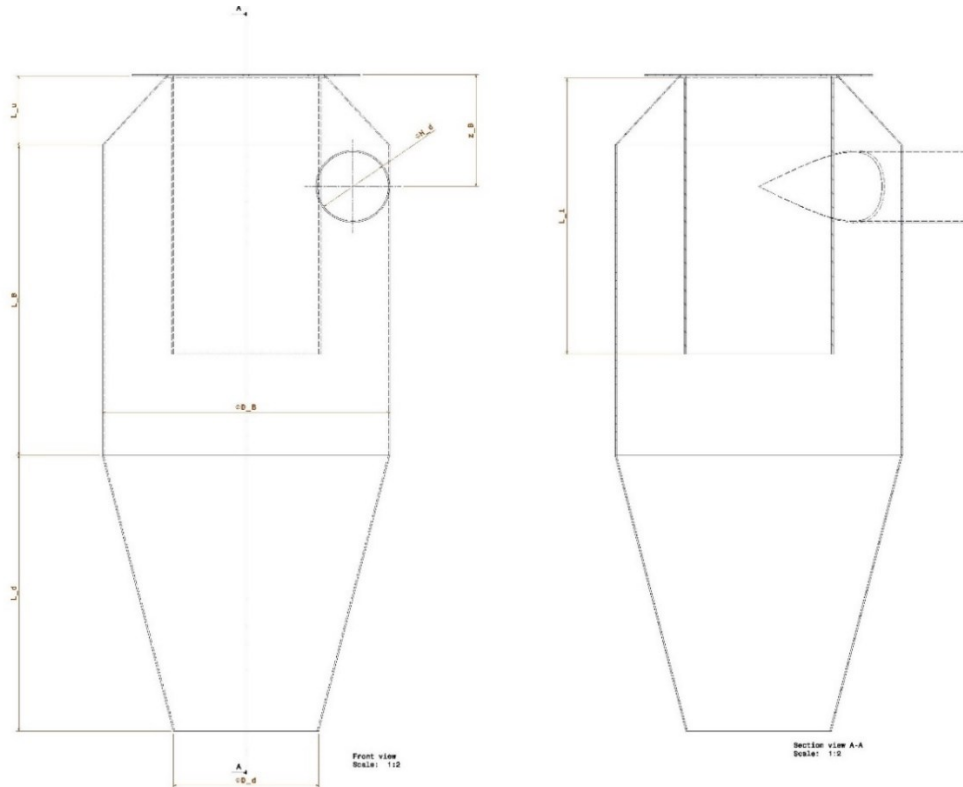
Cyclone's mechanical drawing with front and section views. The design parameters are inserted in the dimensioning of each feature.
